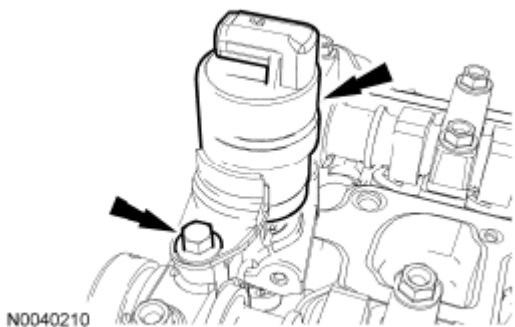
Locating Bolt & Variable Camshaft Timing Solenoid
